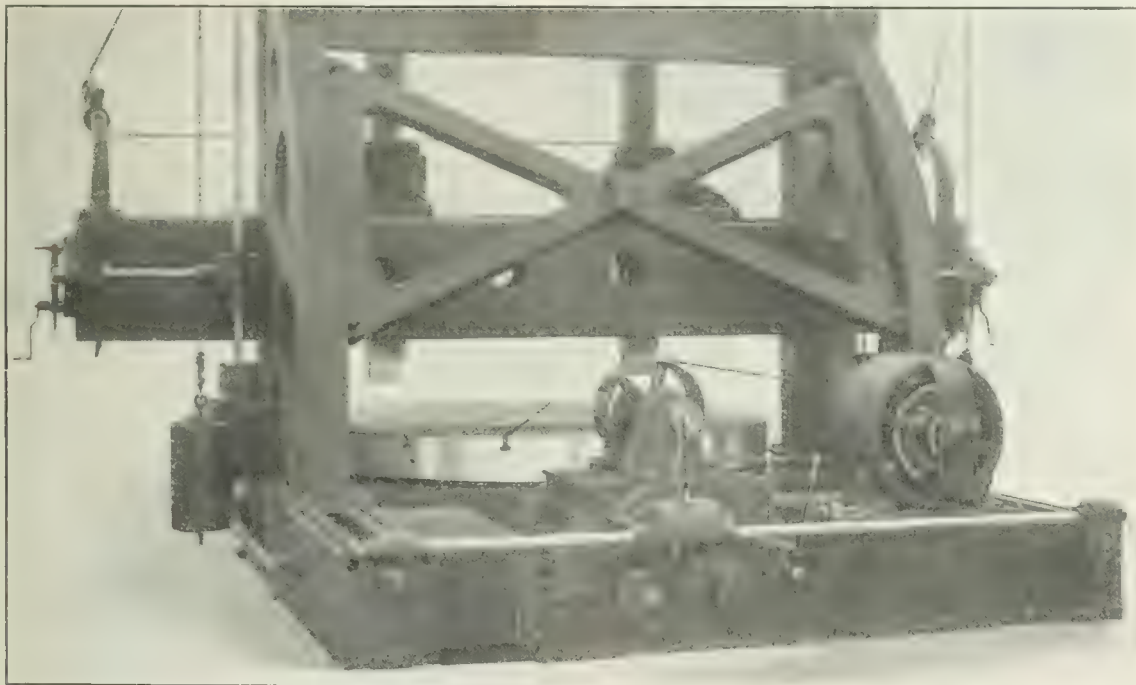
Rear View of the Mill, Showing the Massive Construction of the Housings.
